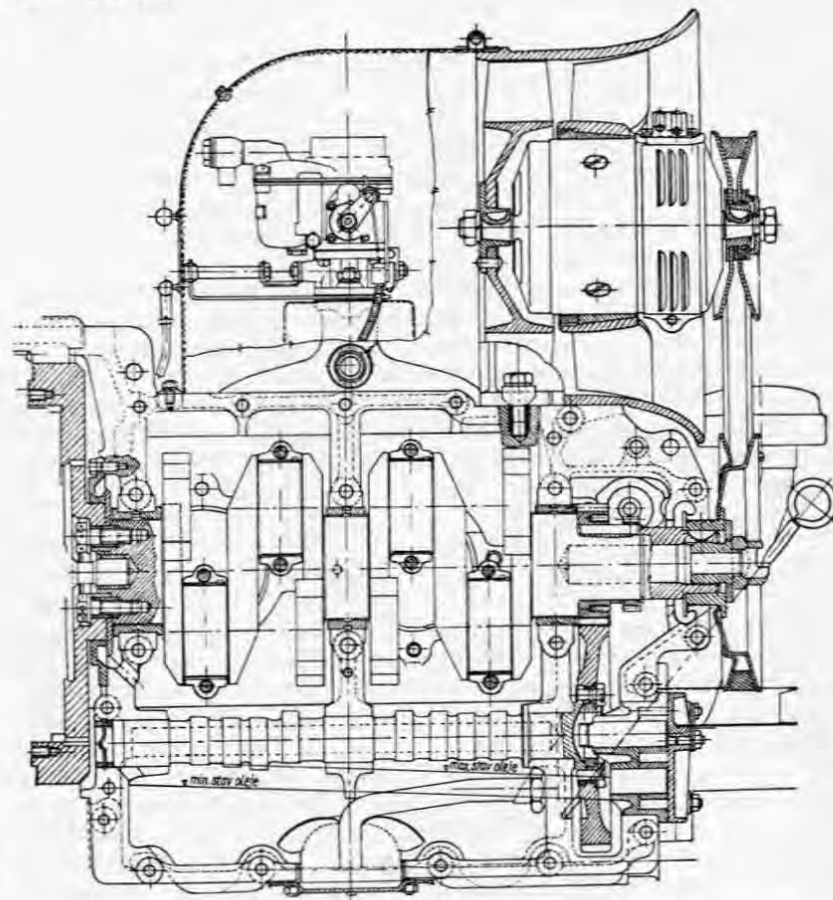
Longitudinal section of the Tatra 600 engine with horizontal fan.
